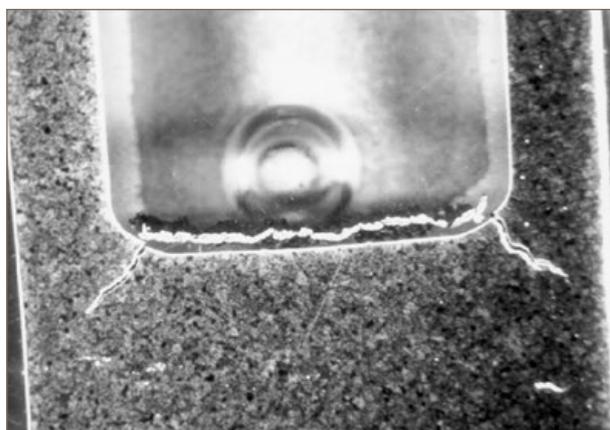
Internal cracks observed in a sintered component, but traced to tooling alignment issues in moulding
